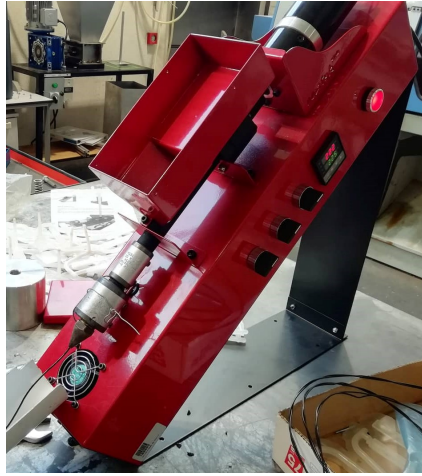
Noztech's Noztech Pro extrusion machine.
